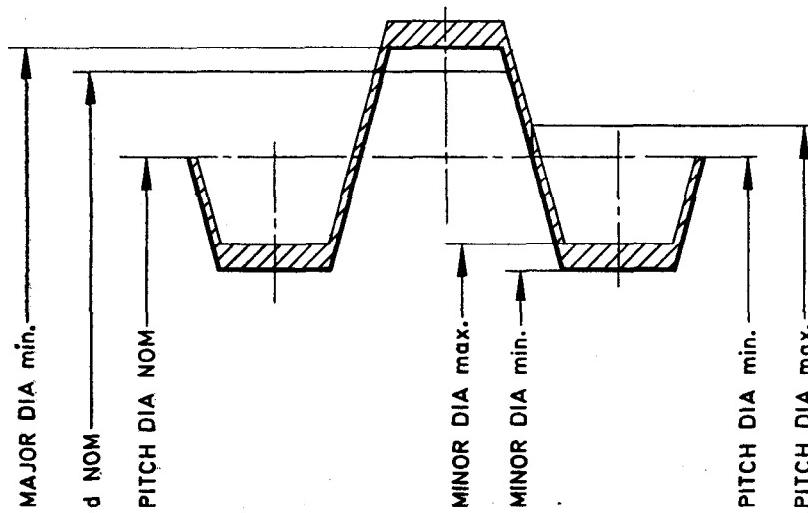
INTERNAL THREADS WITH TOLERANCE POSITION H
